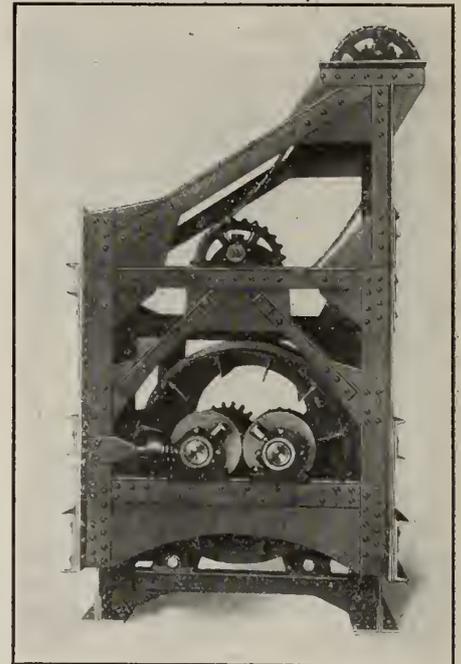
SPECIAL SAND MACHINE FOR STEEL FOUNDRIES.
